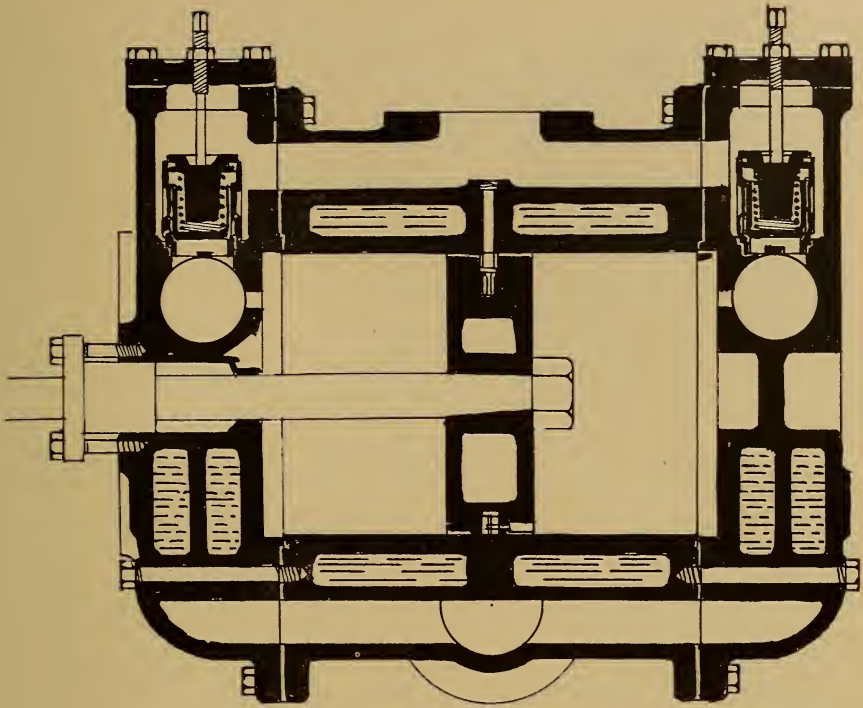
CINCINNATI VALVE GEAR. WORTHINGTON PUMP COMPANY, LTD.
